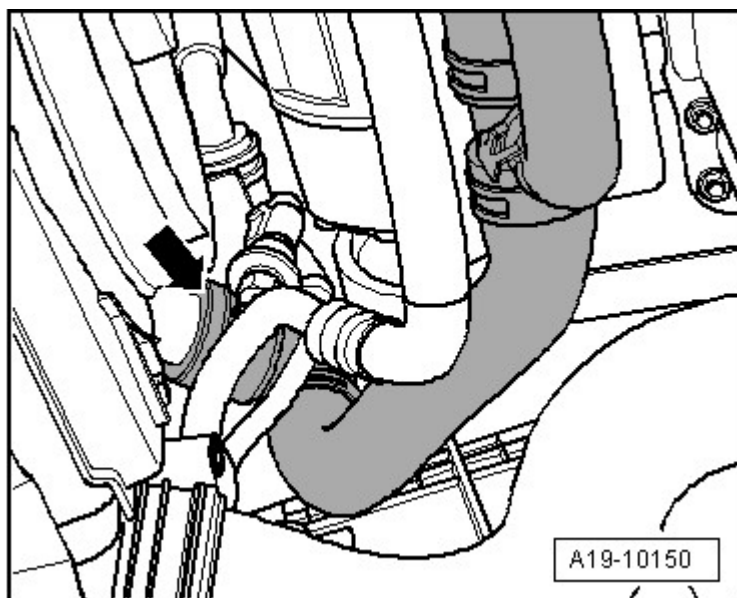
Identifying Coolant Hose Quick Acting Coupling
